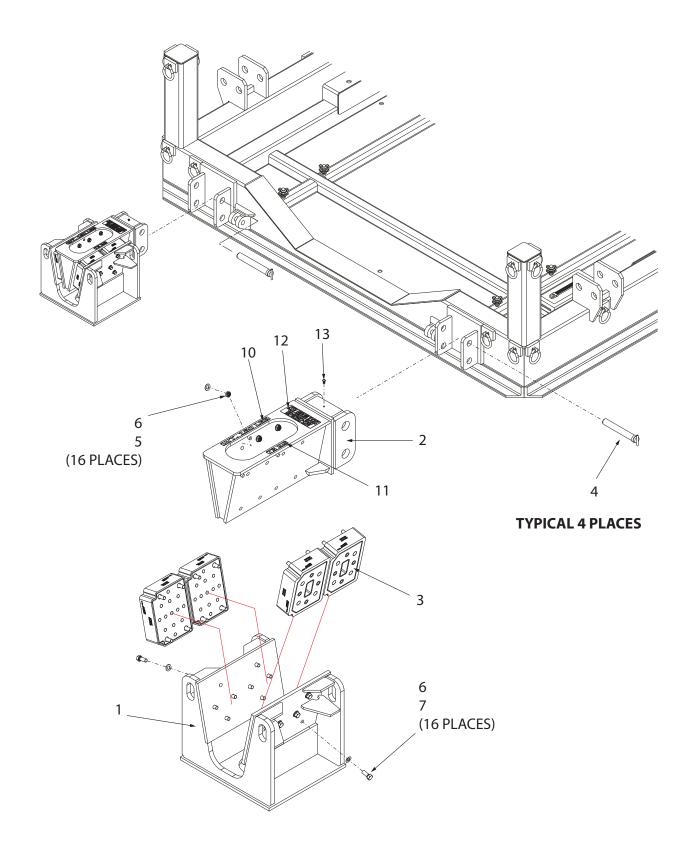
AGSE-E16620-S01 Shock Mount Assembly
